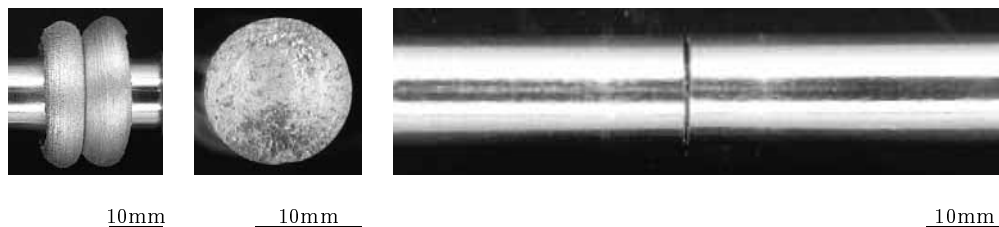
Appearance of burr shape, tensile tested specimens and welded interface.
